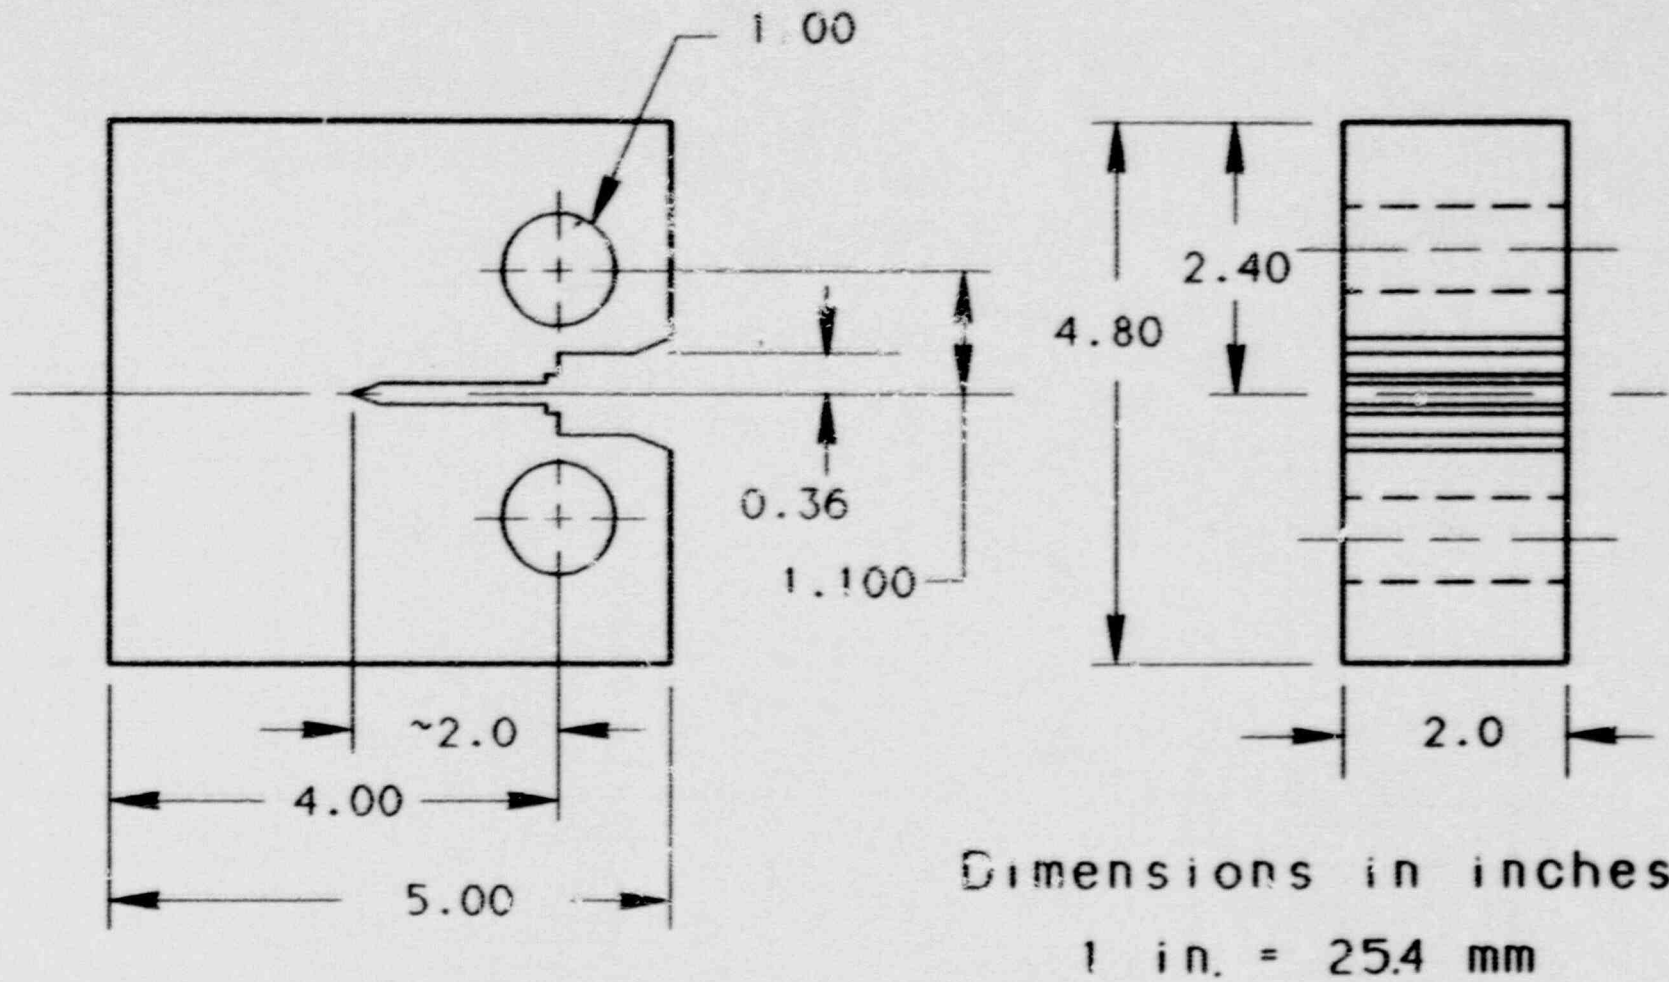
Fracture toughness tests of A 106 Gr. C used this 2T-CT specimen design.
